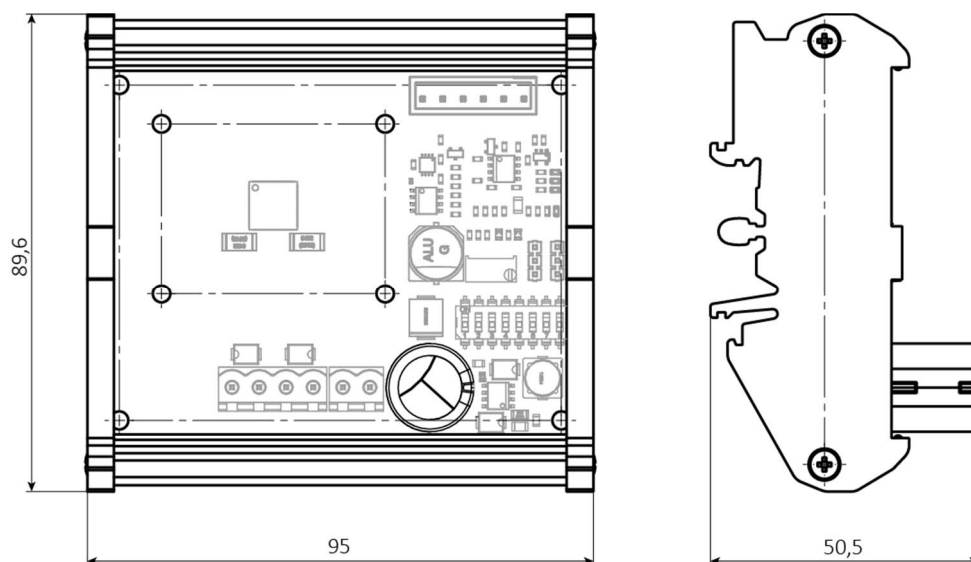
Dimensions of stepper motor driver SMD-1.6 carrier kit version
